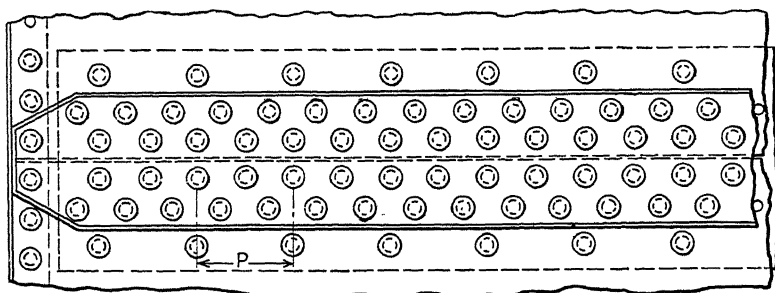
Triple-riveted butt joint, joining single-riveted lap joint. (A.S.M.E. Boiler Code.)
